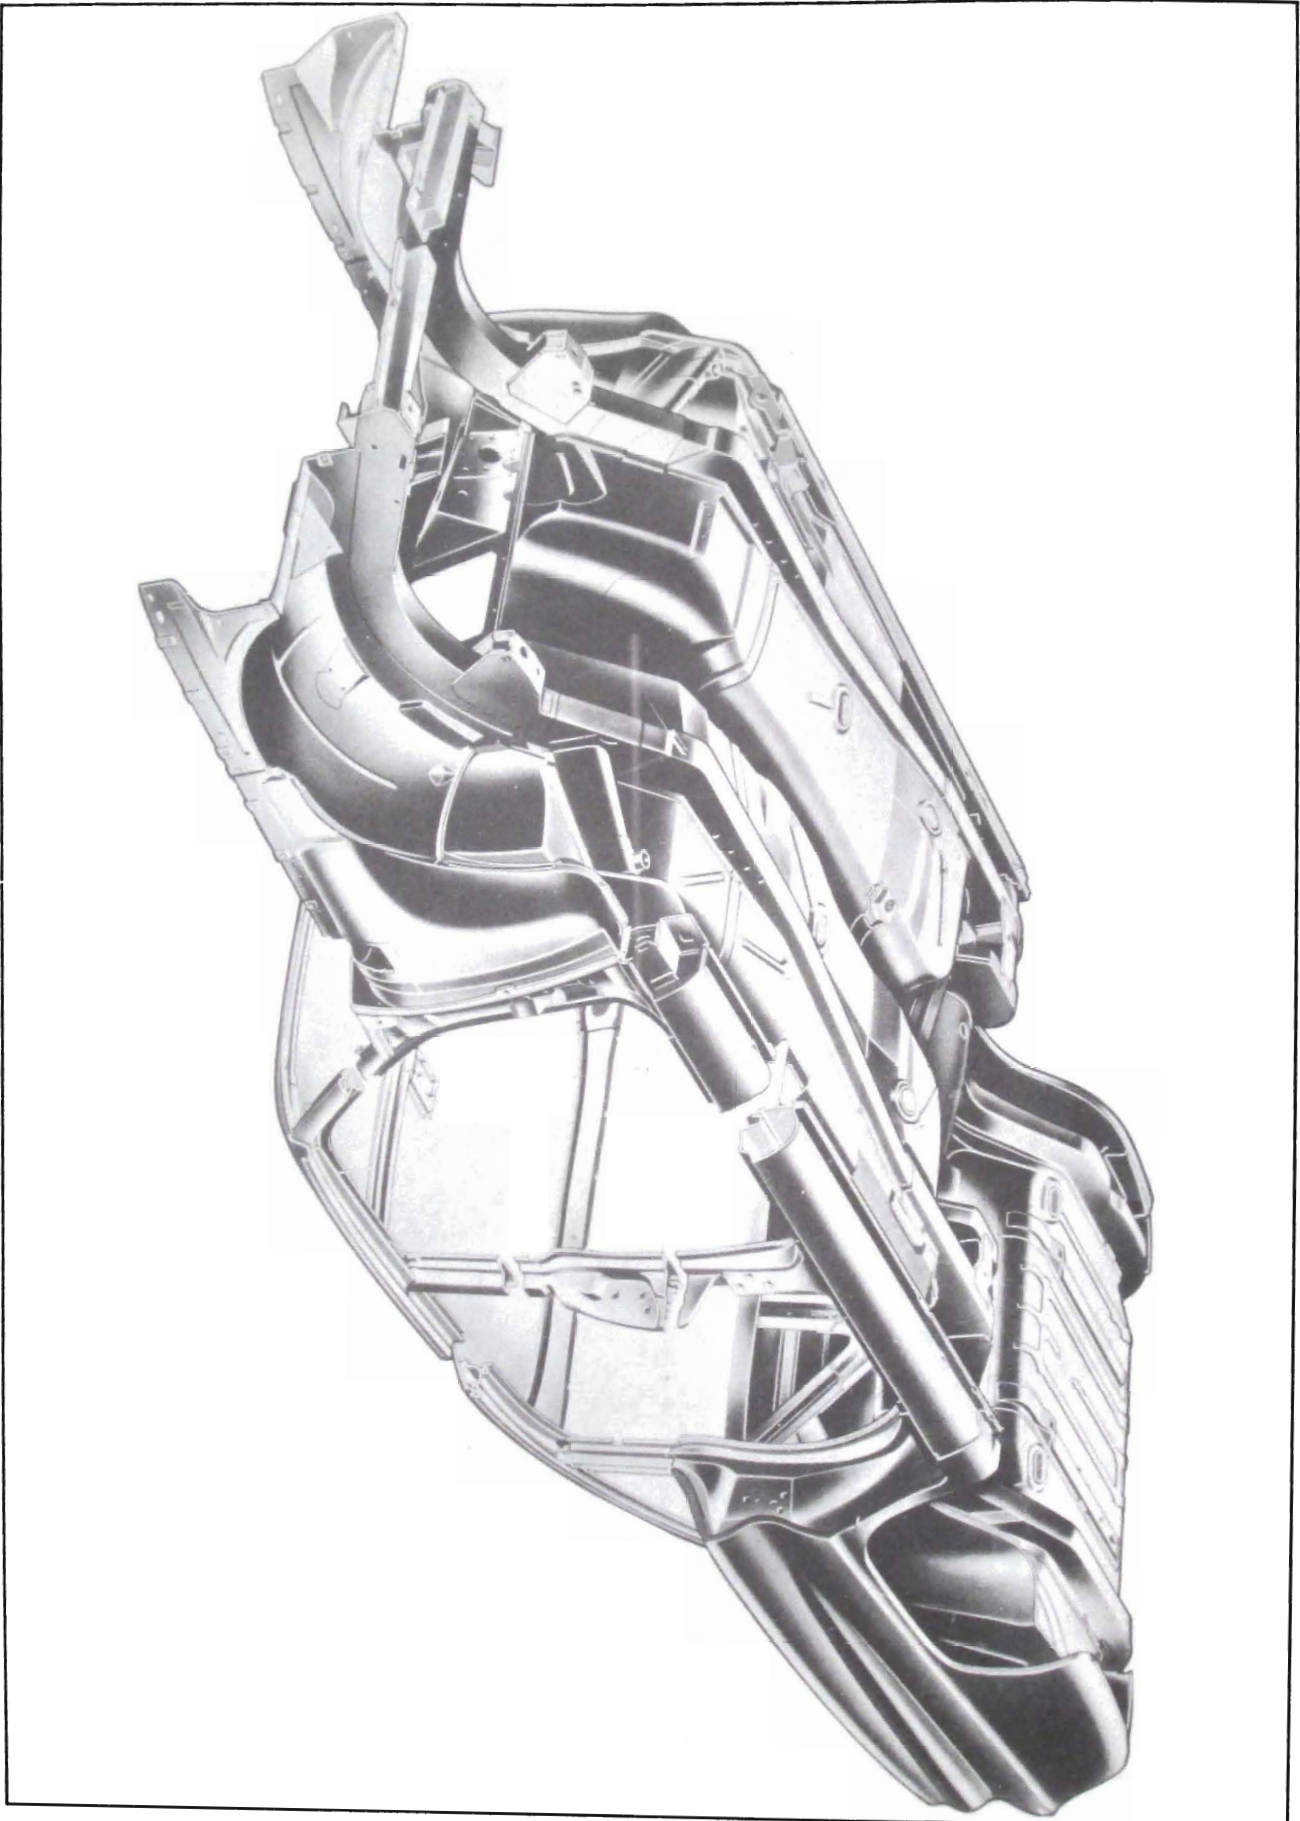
Body Shell - Lower Front Quarter View (4119)
